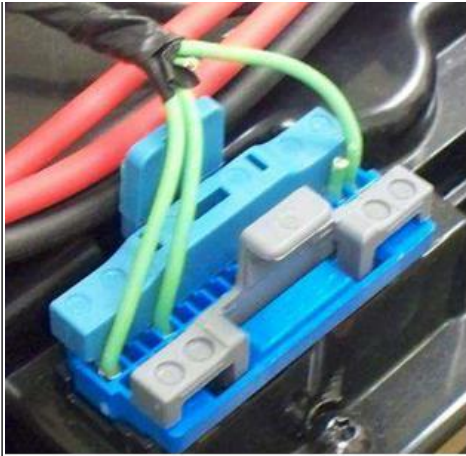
Wire Removal Control Center Assembly Harness 32-Pin Connector.
